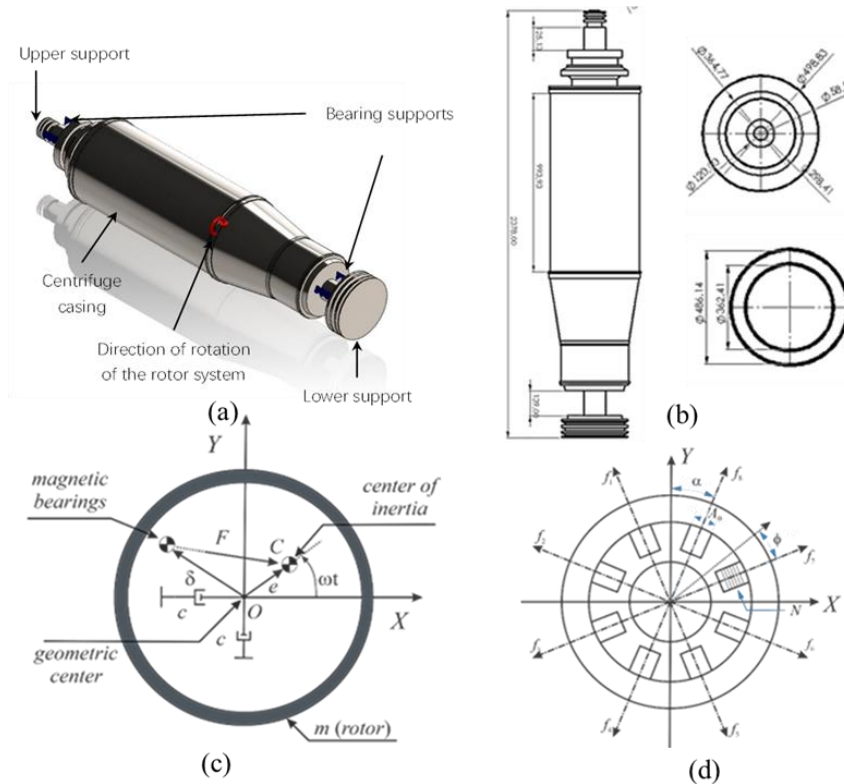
a) Vertical rotor system on magnetic bearings. b) Dimensions of the prototype installation. c) Dynamic model of the rotor system. d) Electromagnetic forces directed from the bearing to the rotor.
